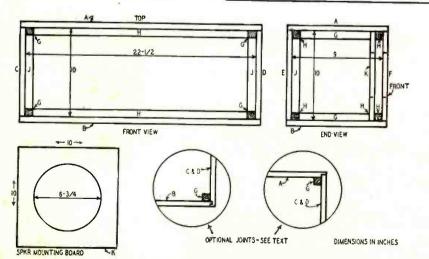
The construction of a bookshelf-type cabinet for an 8-inch speaker. The %-inch blocks are used in all corners except where sides C and D meet front F.
